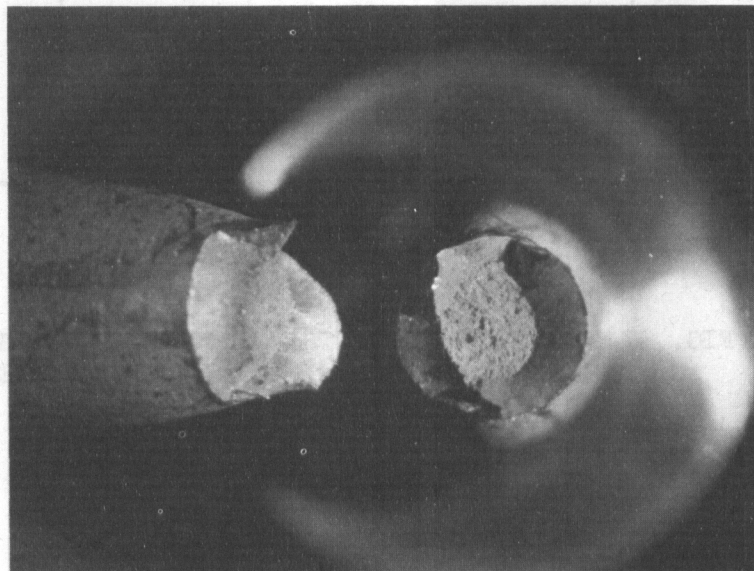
SUSTAINED LOAD FRACTURE FOR Cd-PLATE SMOOTH SPECIMEN. 4340 STEEL. NUCLEATION SUBSURFACE.
